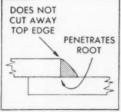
Prevents Cutting-Away of top edge on lap welds... weld flows up to catch top edge without sacrifice in speed. Prevents piling up of metal.
